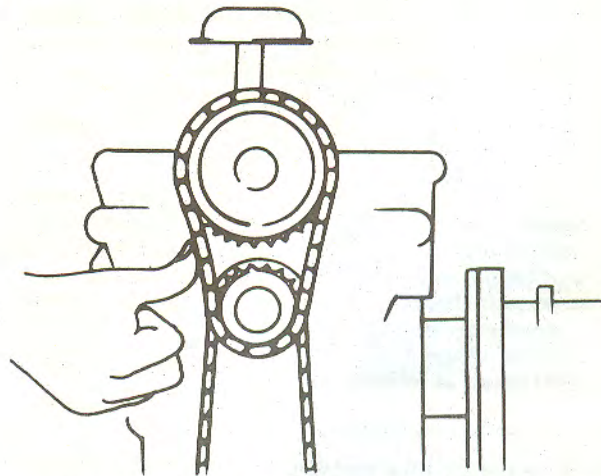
Checking the tension of the oil pump drive chain with thumb pressure. The deflection must not exceed 4.0 mm (0.16 in.) — See text for adjustment.
